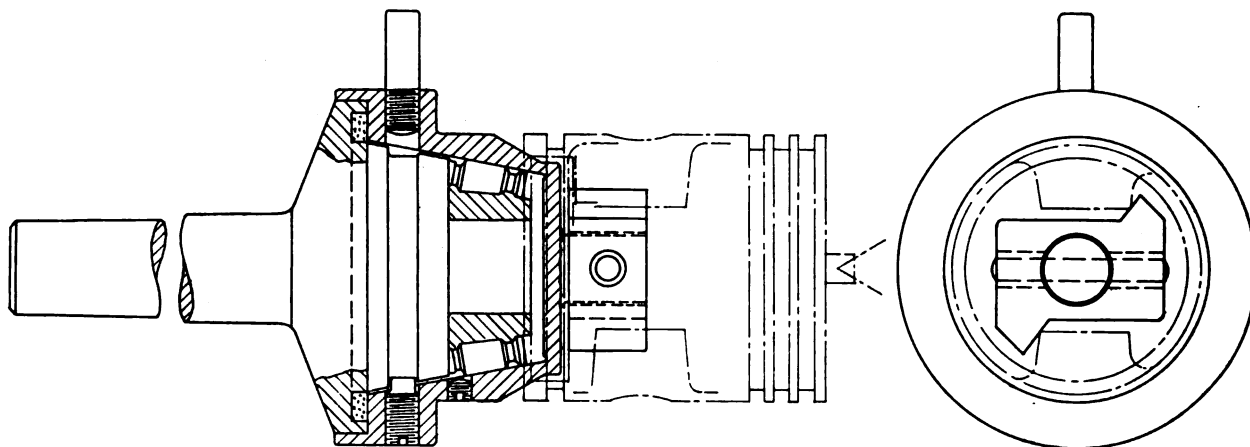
A NEWER FORM OF CENTER IN WHICH THE THRUST AND THE DRIVING LOAD ARE TAKEN BY A TAPER ROLLER BEARING
